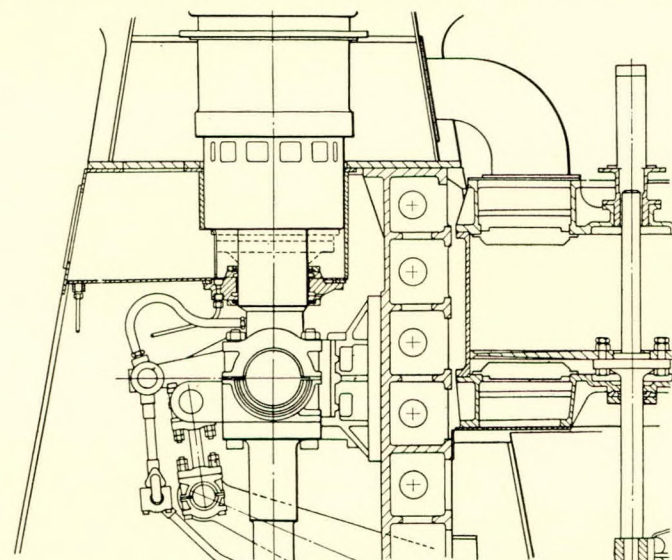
Sectional arrangement of diaphragm engine with a bore of 670 mm. and a connecting rod/crank ratio of 3.55:1. The lower piston is oil-cooled through telescopic piping
